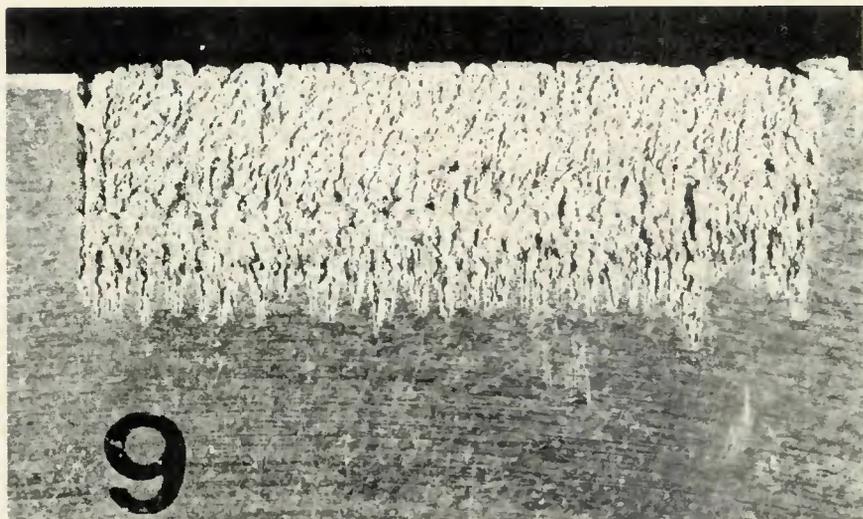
Typical partial penetration electron beam weld in 7075 aluminum. Spiking can be seen at the root of the weld X5, not reduced
